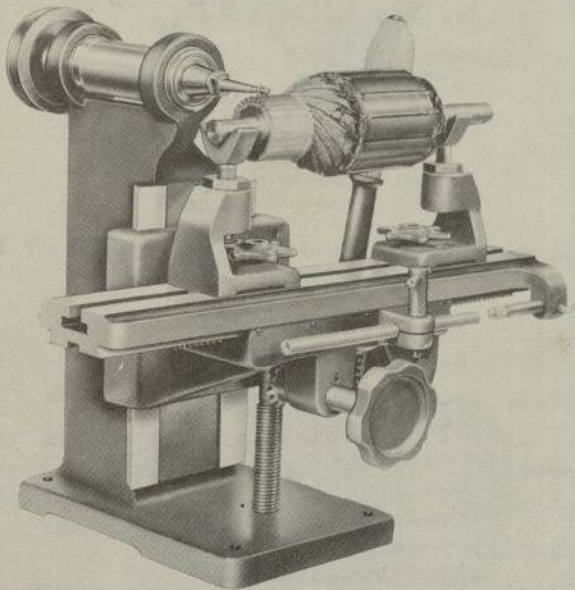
Peerless Mica undercutter. (Peerless Tool Division Cam Industries Inc.)
